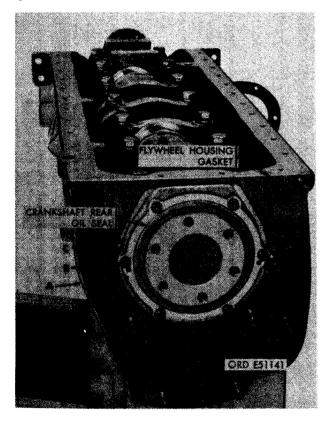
REMOVING OR INSTALLING FLYWHEEL HOUSING.
